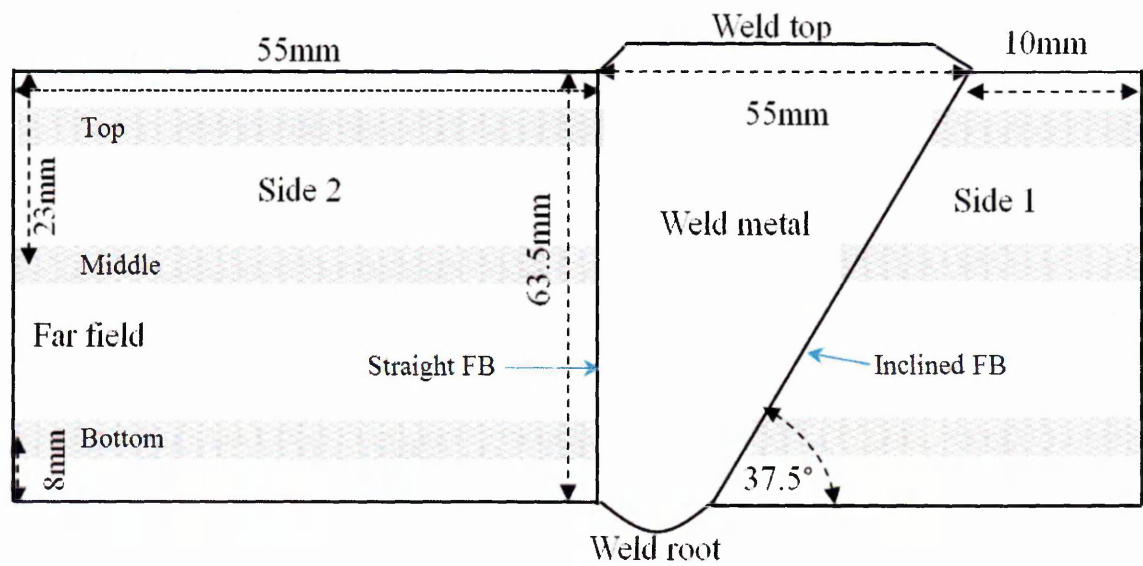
Schematic drawing showing the through thickness weld profile and the EBSD measurement areas (shaded zones) of Type 316H stainless steel weldment (Weld-3).
